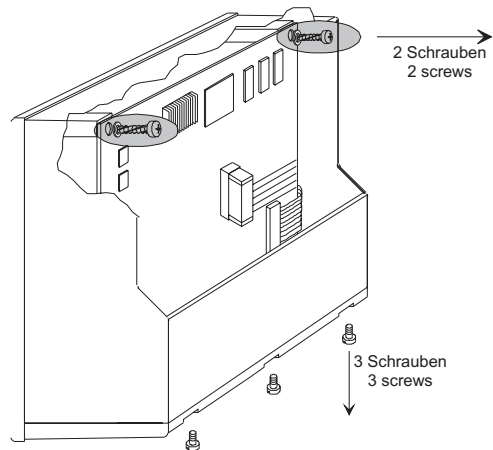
Unscrew and removal of main pcb and connector panel
